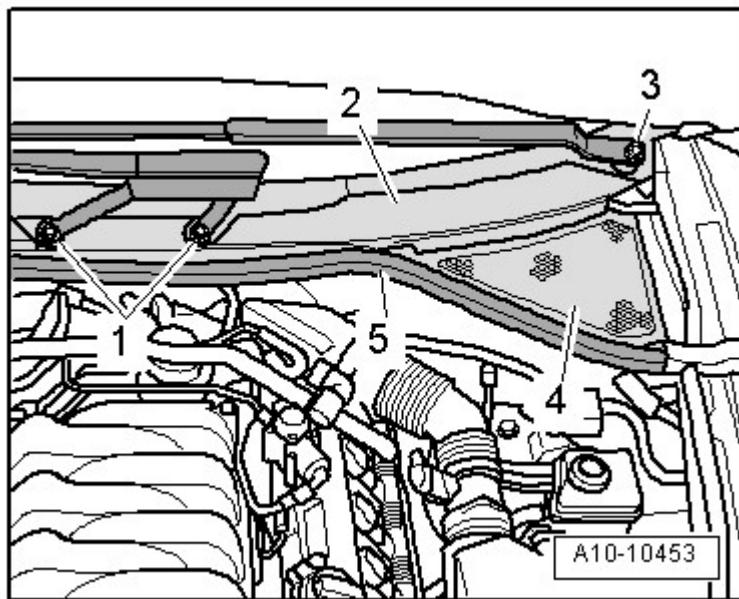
Identifying Windshield Wiper, Driver Side, And Nut -3-, Plenum Chamber Cover -4- And Rubber Seal -5-
